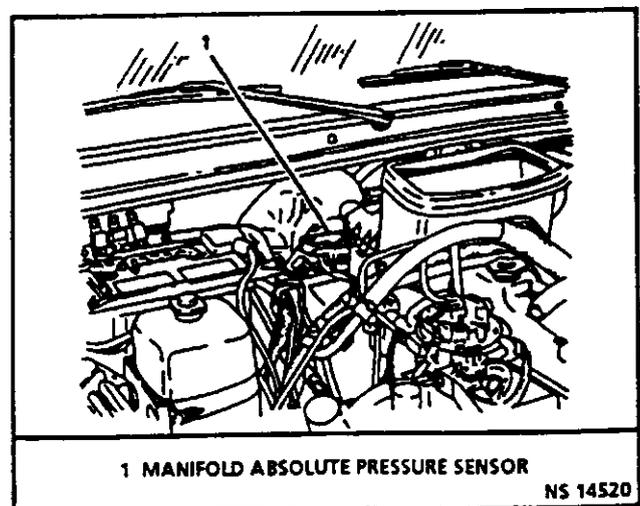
Manifold Absolute Pressure Sensor Location View
